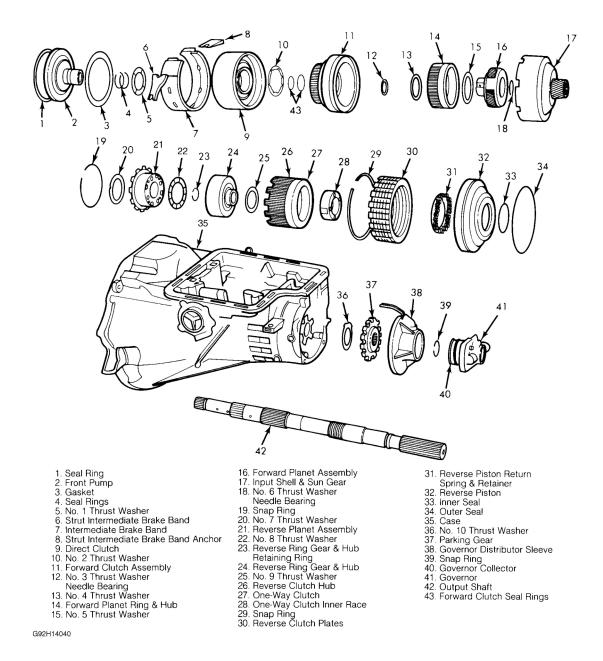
Exploded View Of Output Shaft & Governor Assembly Courtesy of FORD MOTOR CO.
